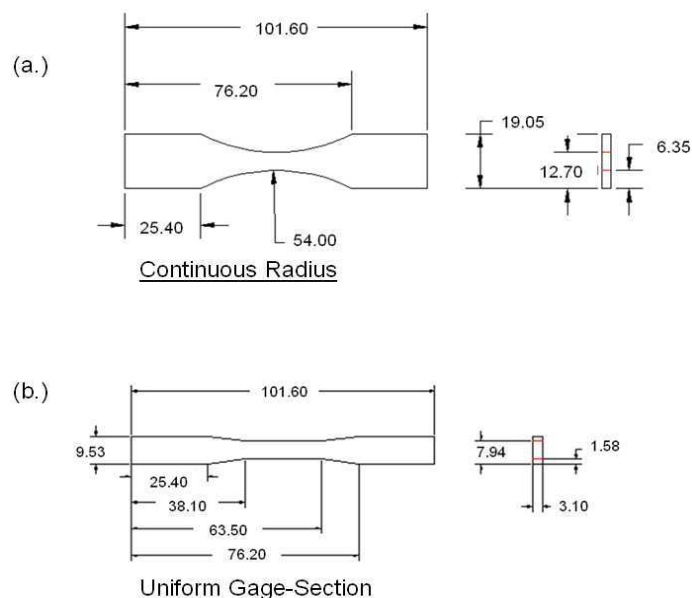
ASTM fatigue specimen dimensions (mm): (a.) Continuous radius, (b.) uniform gage-section.
